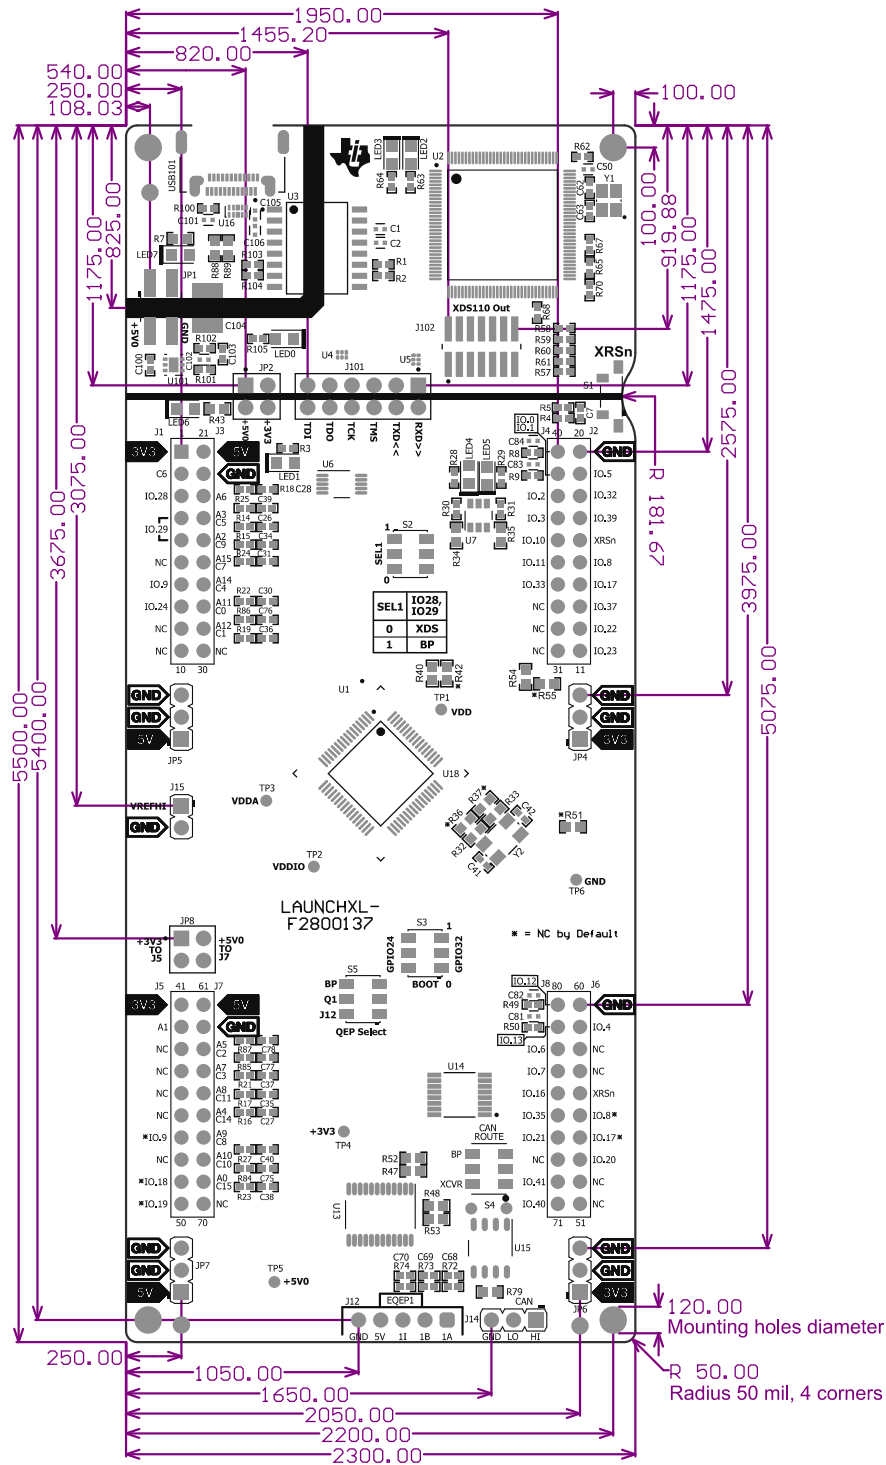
F280013x LaunchPad™ Dimensions and Component Locations
